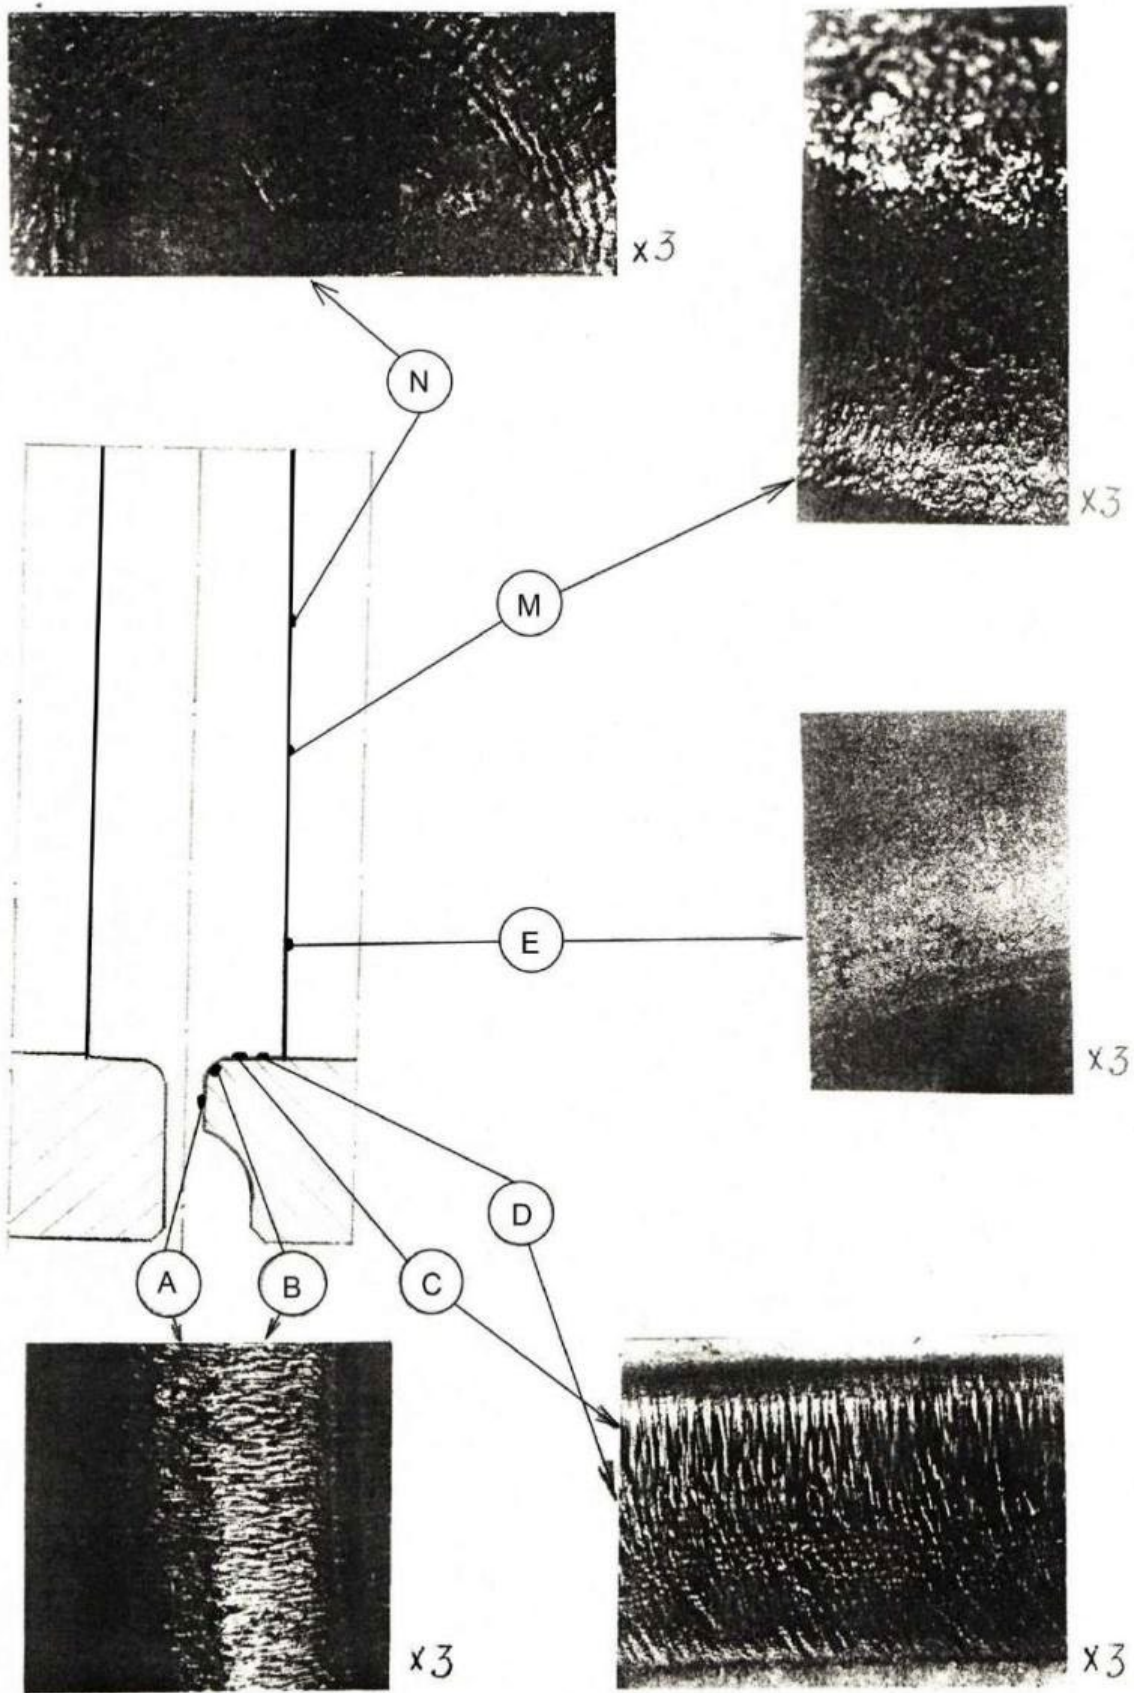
Damage corps And striker, reinforced detonation spraying
